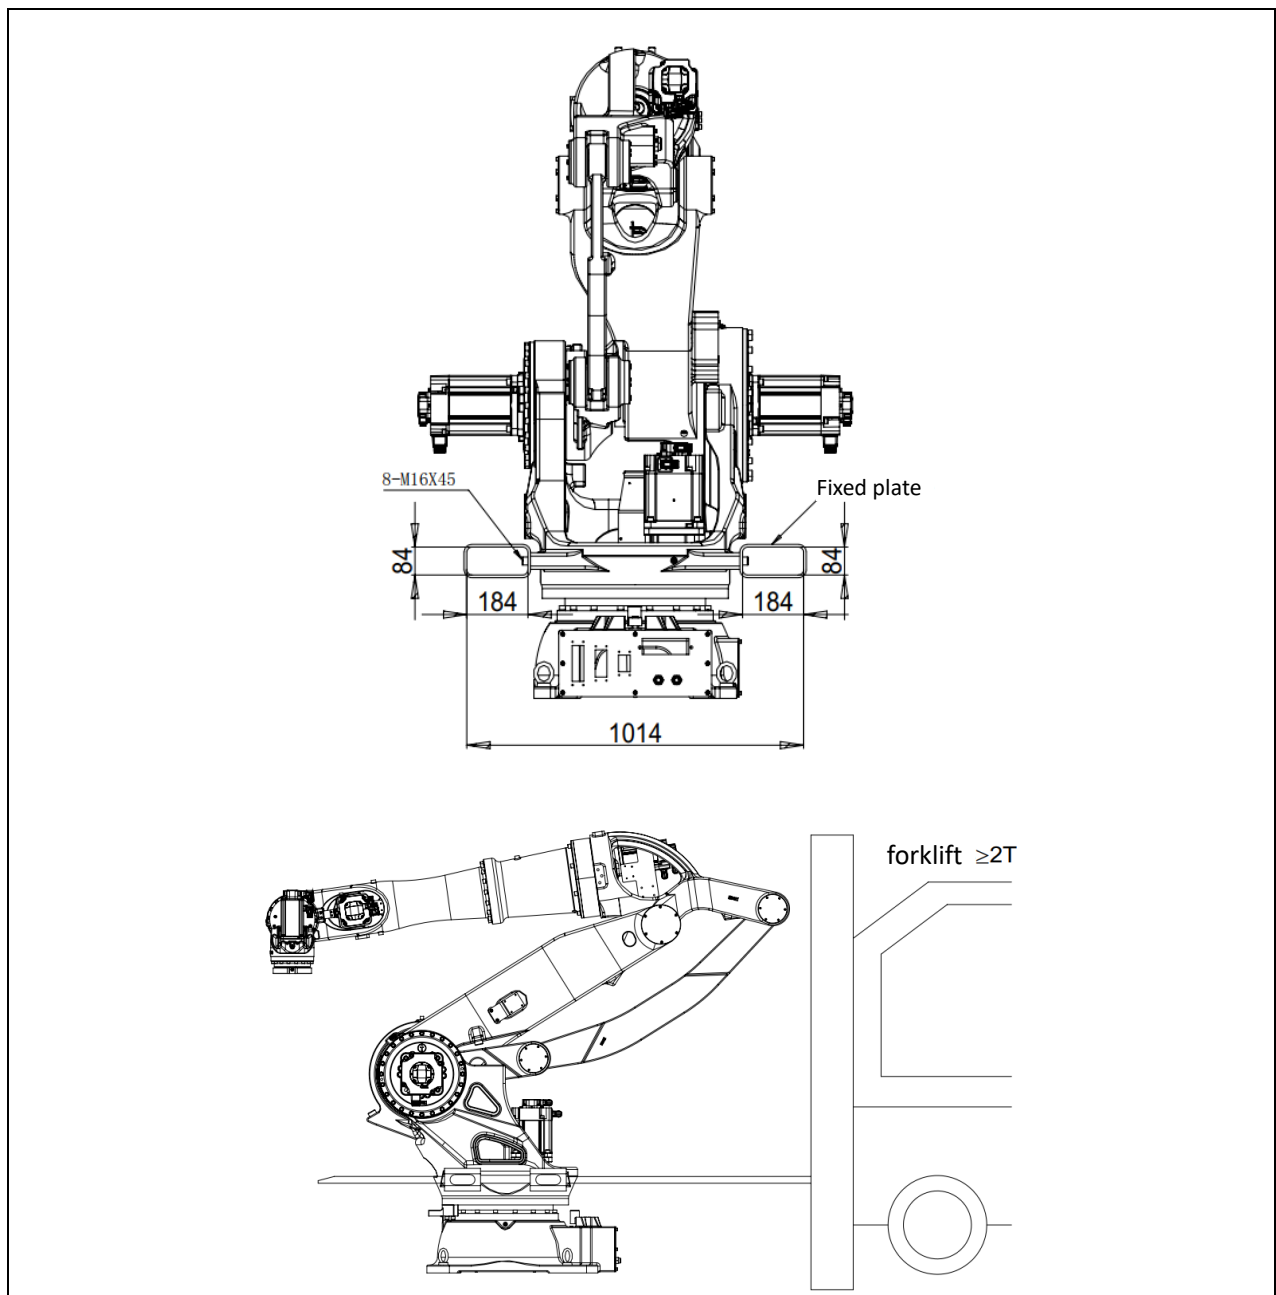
Use a forklift to transport the robot (ER220-3200, ER280-3200, ER280-3200-LI)
